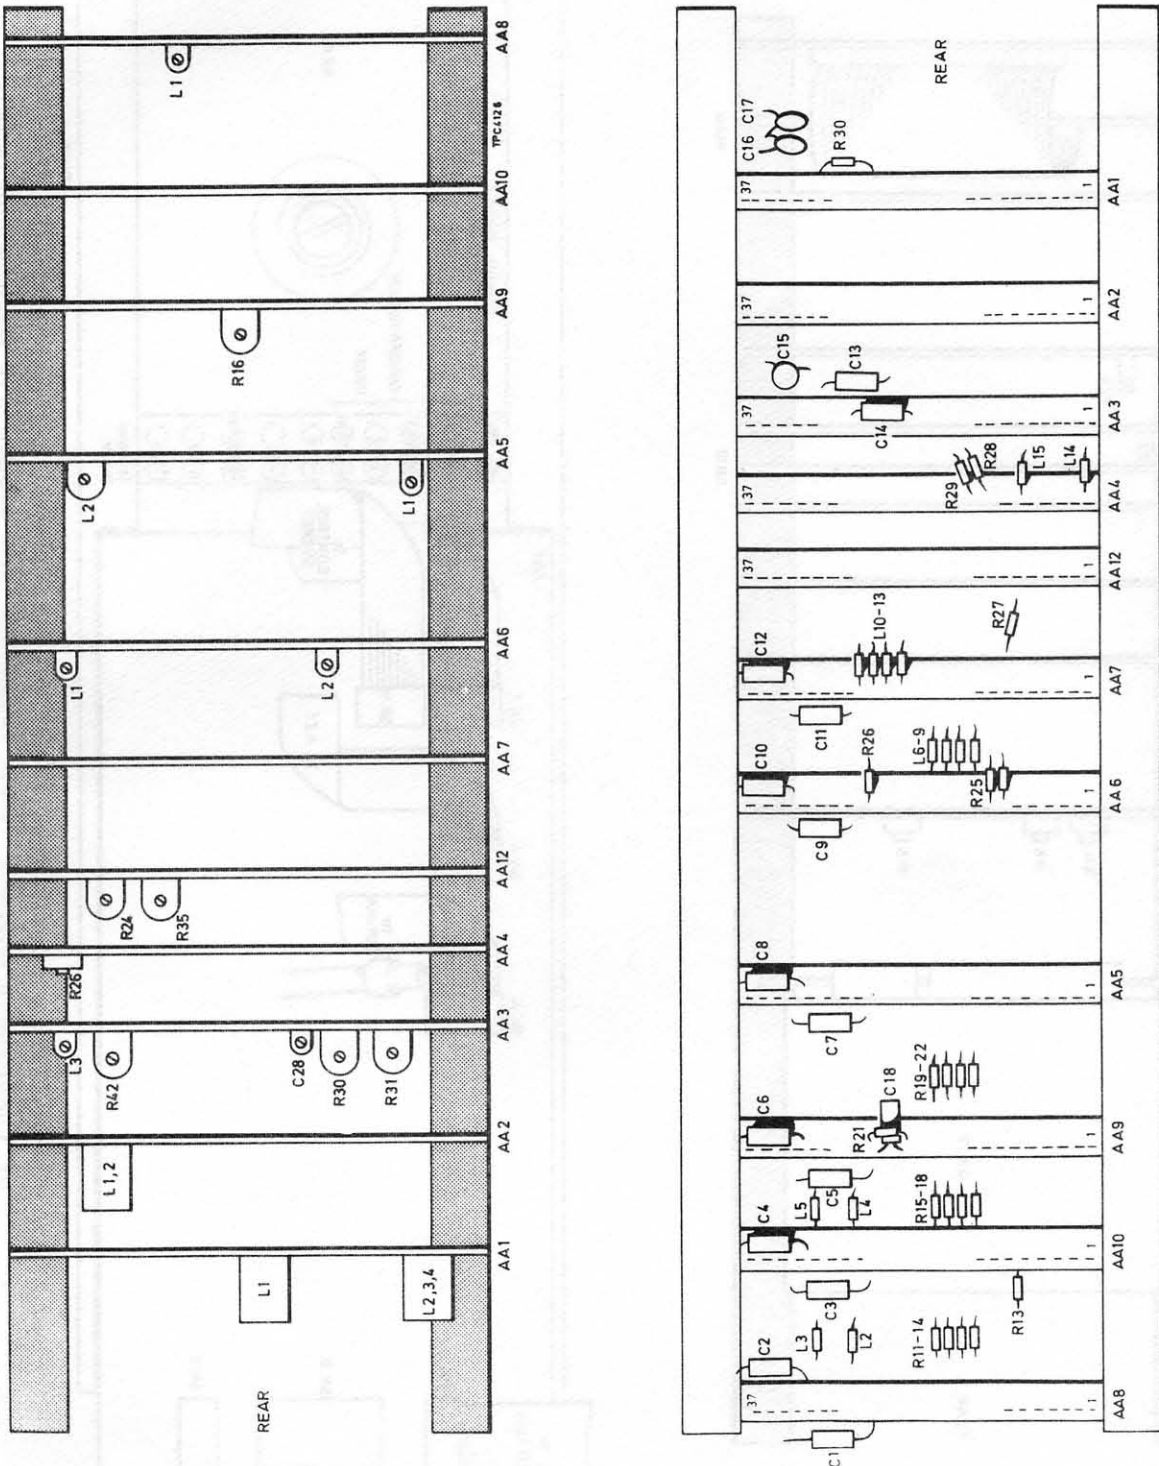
RF unit assembly. Views of top (above) and bottom (below) of instrument showing board locations and accessible adjustment points
